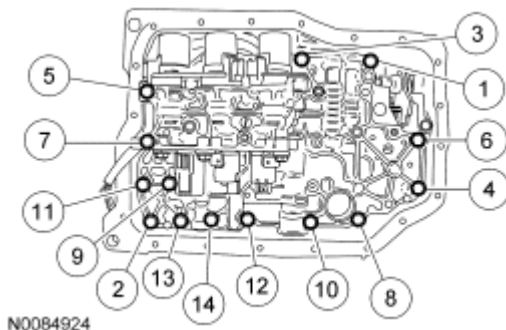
Tightening Main Control Valve Body Retaining Bolts In Sequence
